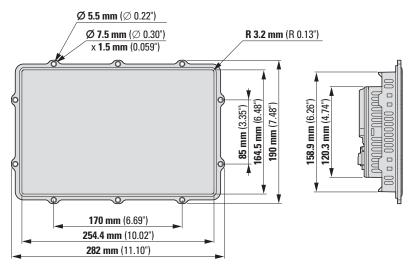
Dimensions for 10.1" rear (panel) mounting devices in mm (inches)XV-313-..-...-A11-..
